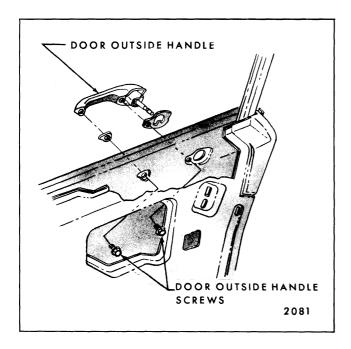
Door Outside Handle Removal (Push-Button Type)
